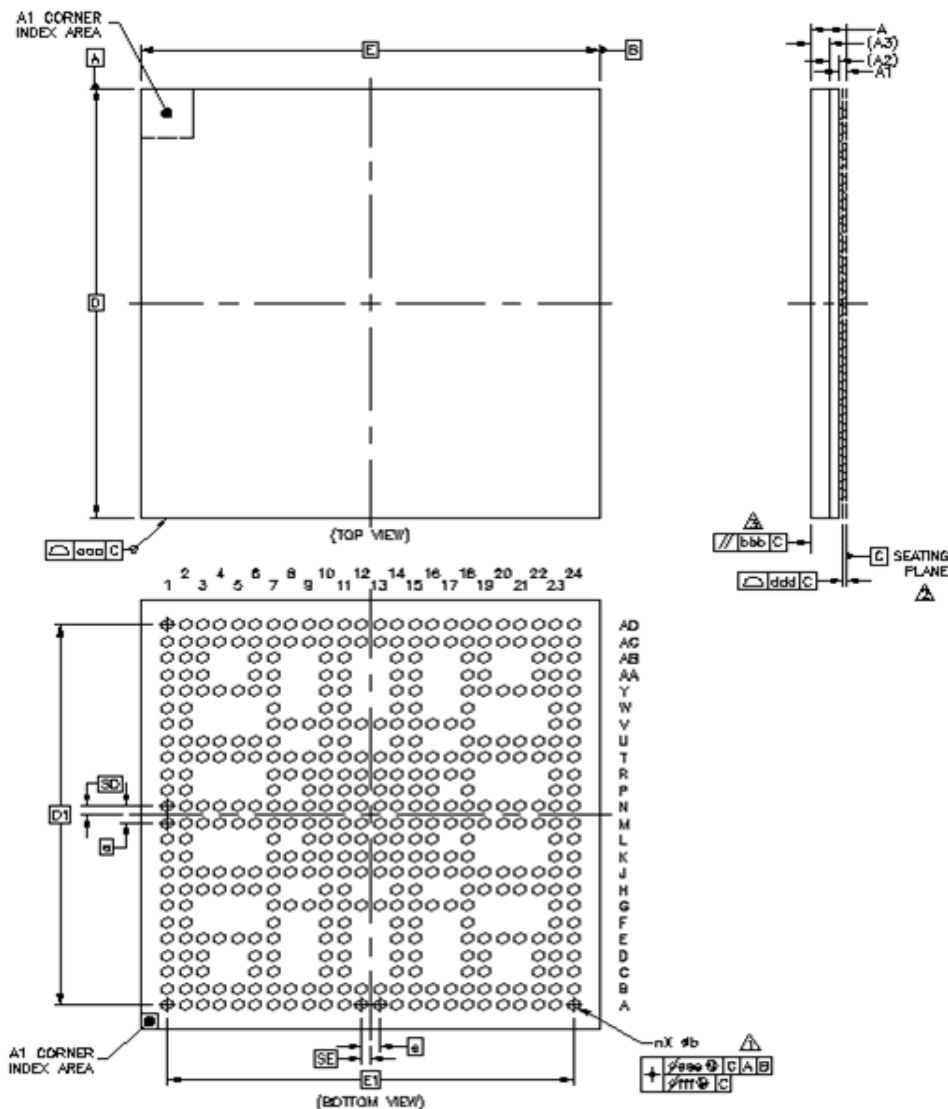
13 x 13, 0.5 mm BGA Package Top, Bottom, and Side Views
